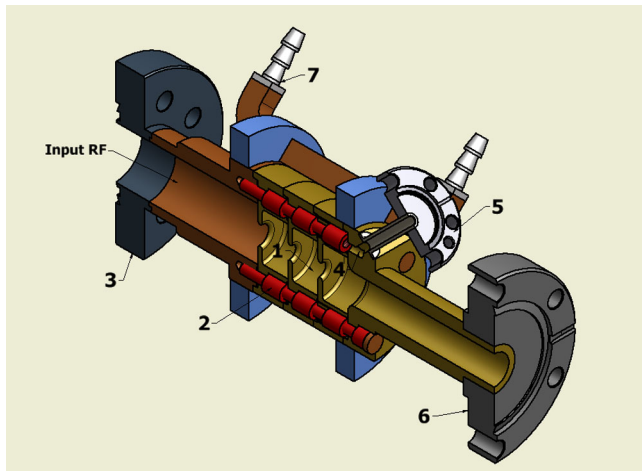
Solid model, one-half of the welded single-cell cavity: (1) middle high-gradient cell, rf vacuum chamber, (2) special screws for clamping, (3) input rf flange, (4) secondary vacuum chamber, (5) Conflat vacuum flange for the secondary vacuum chamber, (6) downstream Conflat vacuum flange, and (7) water cooling pipe.
